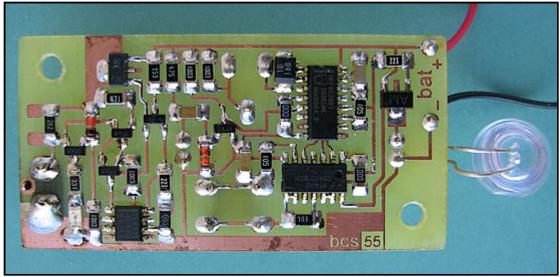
Plate with pl. joint Fig. 7. PCB view
